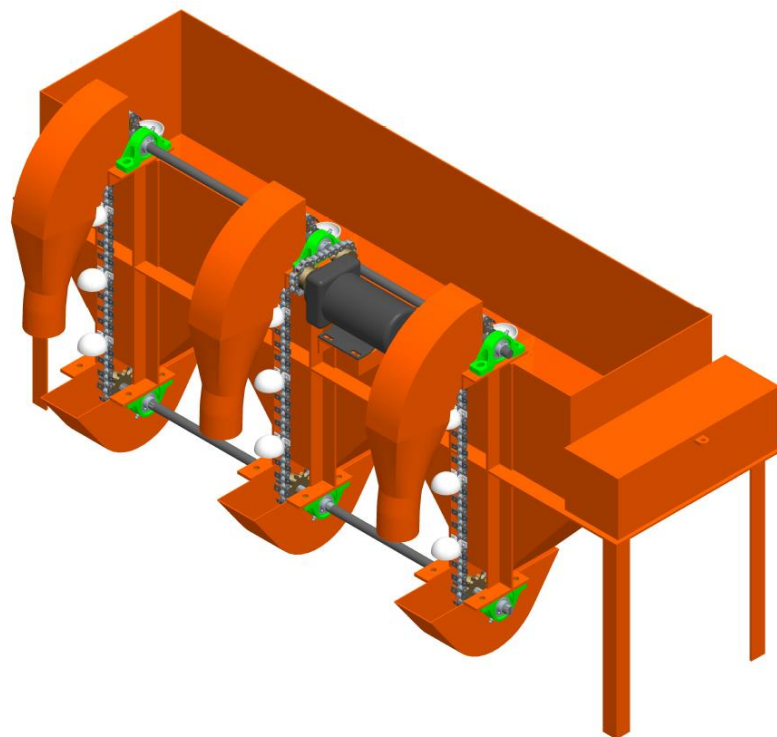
Isometric view of the main hopper, seed metering, seed delivery tube, seed collector, frame, tool box, chain with cups and tool box
